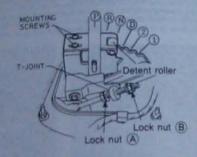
Shift control cable adjustment showing locknuts and detent roller engaged in the 'N' position (Sec 9)
